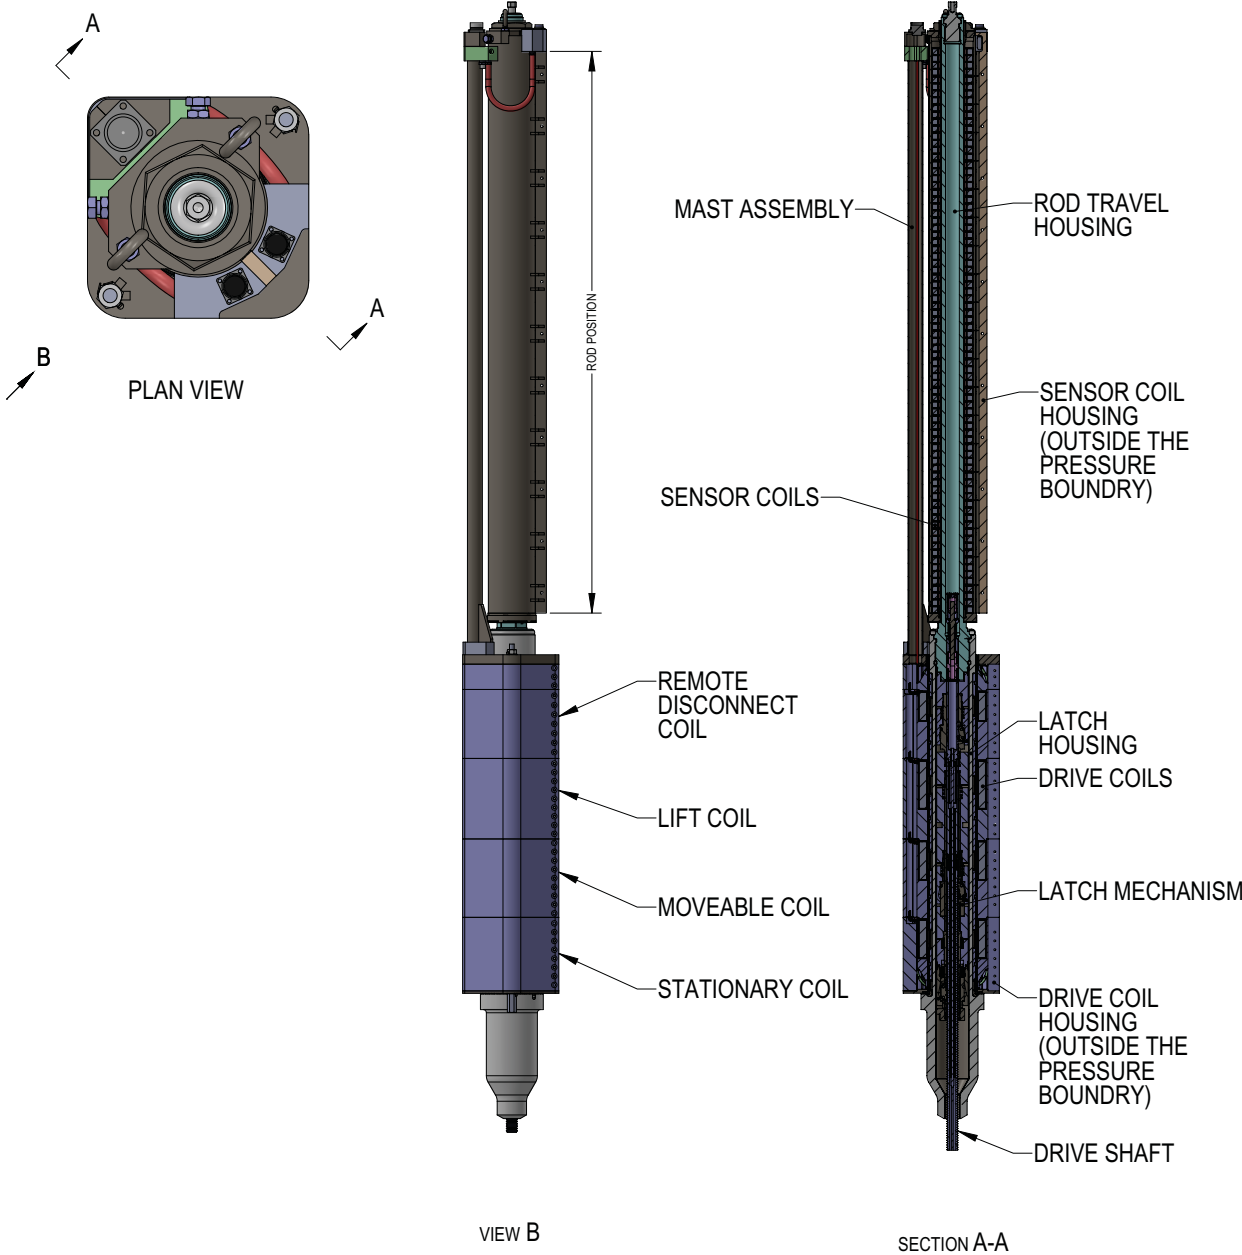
Control Rod Drive Mechanism Drive Coil and Cooling Detail
